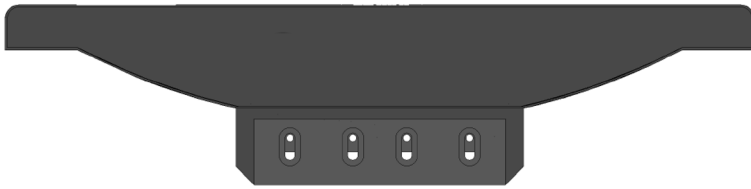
Pin Mount Bar with 4 Holes for Screws
